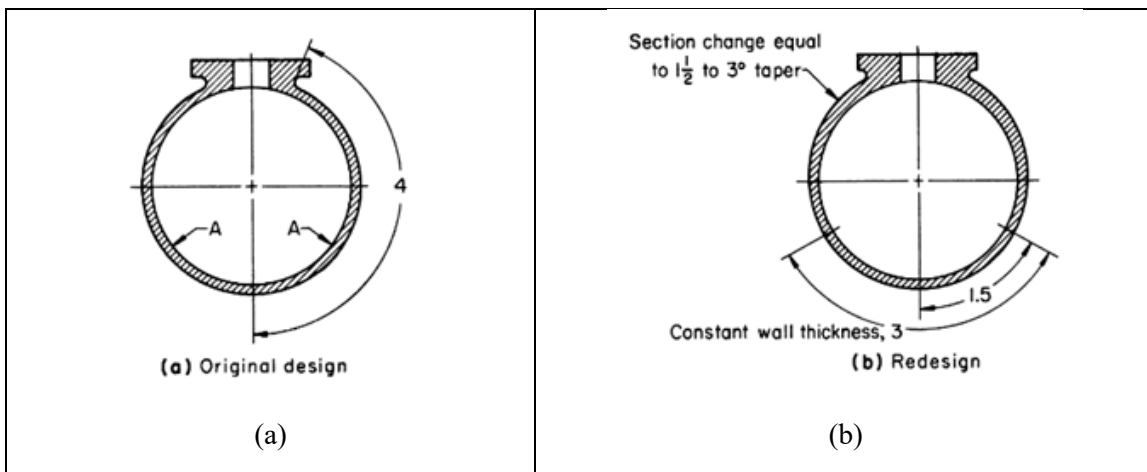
Flanged Spheric Casting. Flanged Spherical Casting. The original design (right) that exhibited feeding restrictions due to uniform wall thickness. The redesigned component enabled better metal flow. This component was produced by a shell mold.
